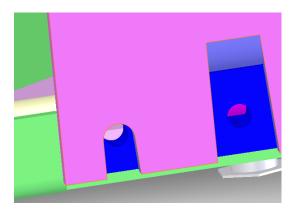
First alignment between the molded part and assembly, using a screw for the left hole.
